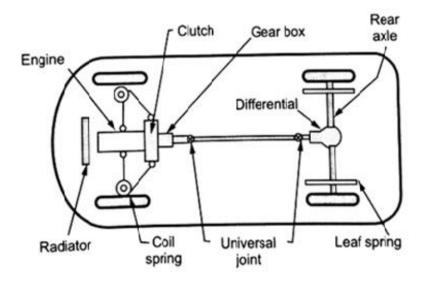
FRONT ENGNINE REARE WHEEL
